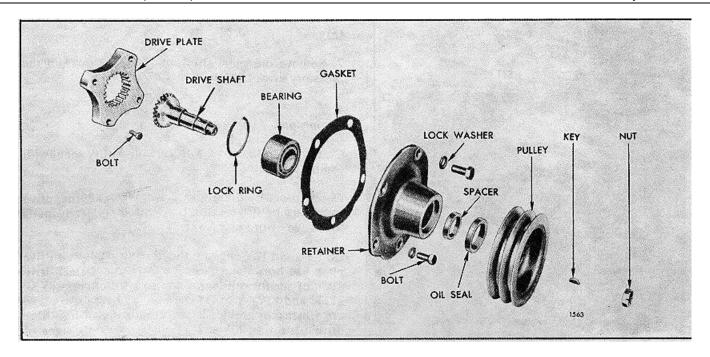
Components of Accessory Drive for Belt-Driven Accessory (Drive Plate Type)
